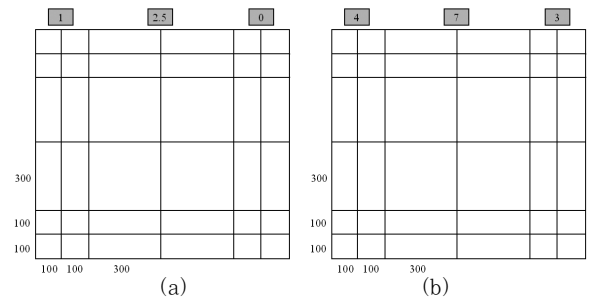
Longitudinal shrinkage of experimental model, in mm (a) front side 1 layer-welded specimen, (b) back side 1 & 2 layer-welded specimen
